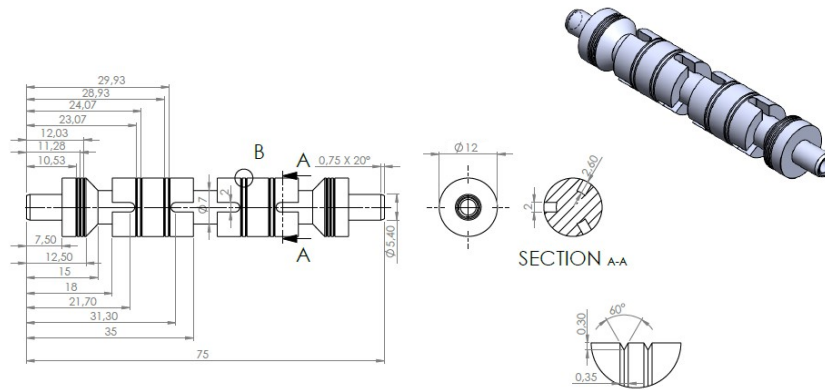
Detailed section from the manufacturing drawing of the spool for hydraulic proportional directional valves.
